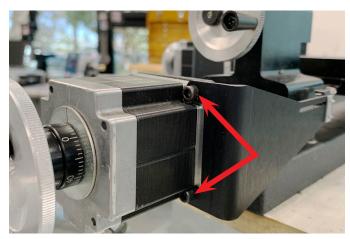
The red arrows show the location of the two stepper motor mounting SHC screws.
